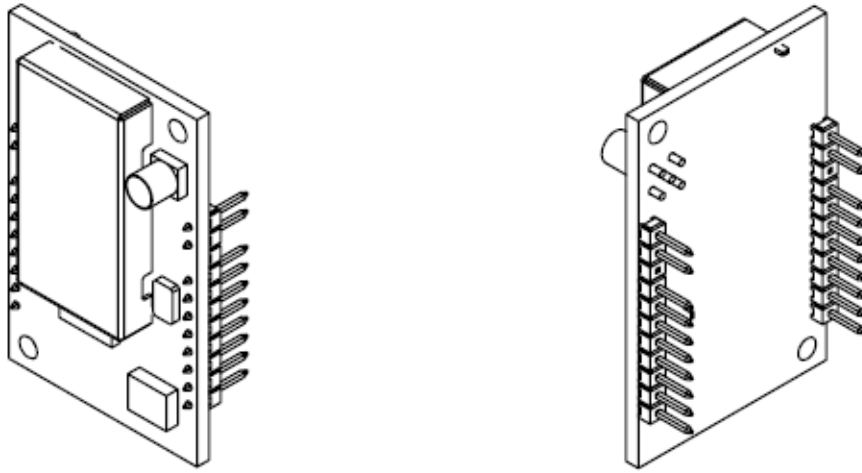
M2135-1/M2030-1 Mote—Mechanical Drawing
